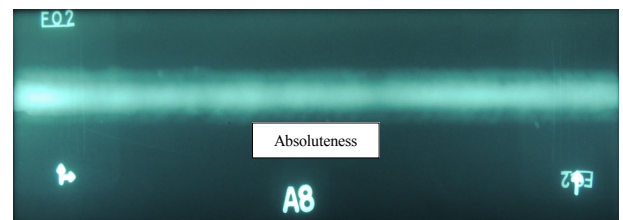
X-ray Radiographic test film of welding specimen to 4pass at CO₂ 20% +Ar80% in 20 L/min
